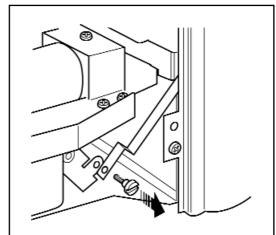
Control linkage disconnection (Fascia may differ from that shown)
